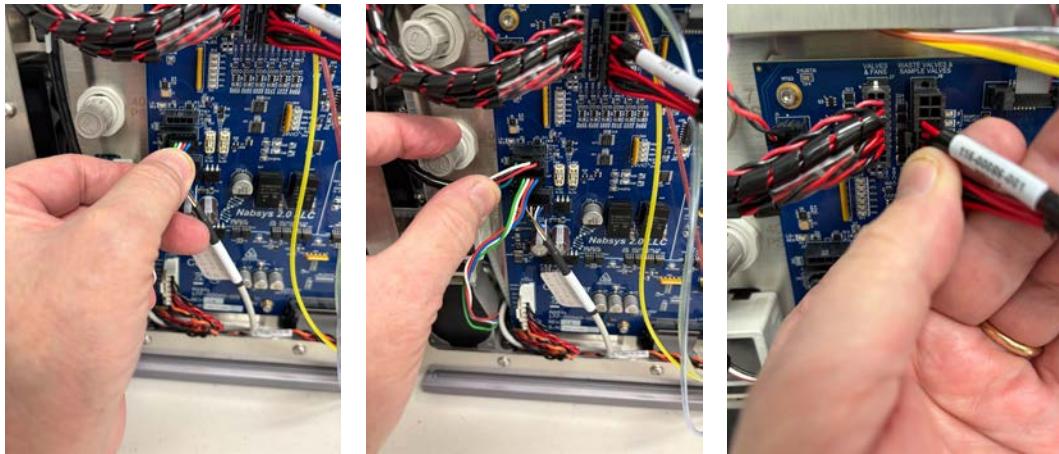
Installing the I/O PCB compressor connector (left), low pressure regulator connector (middle), and waste valves connector (right).
